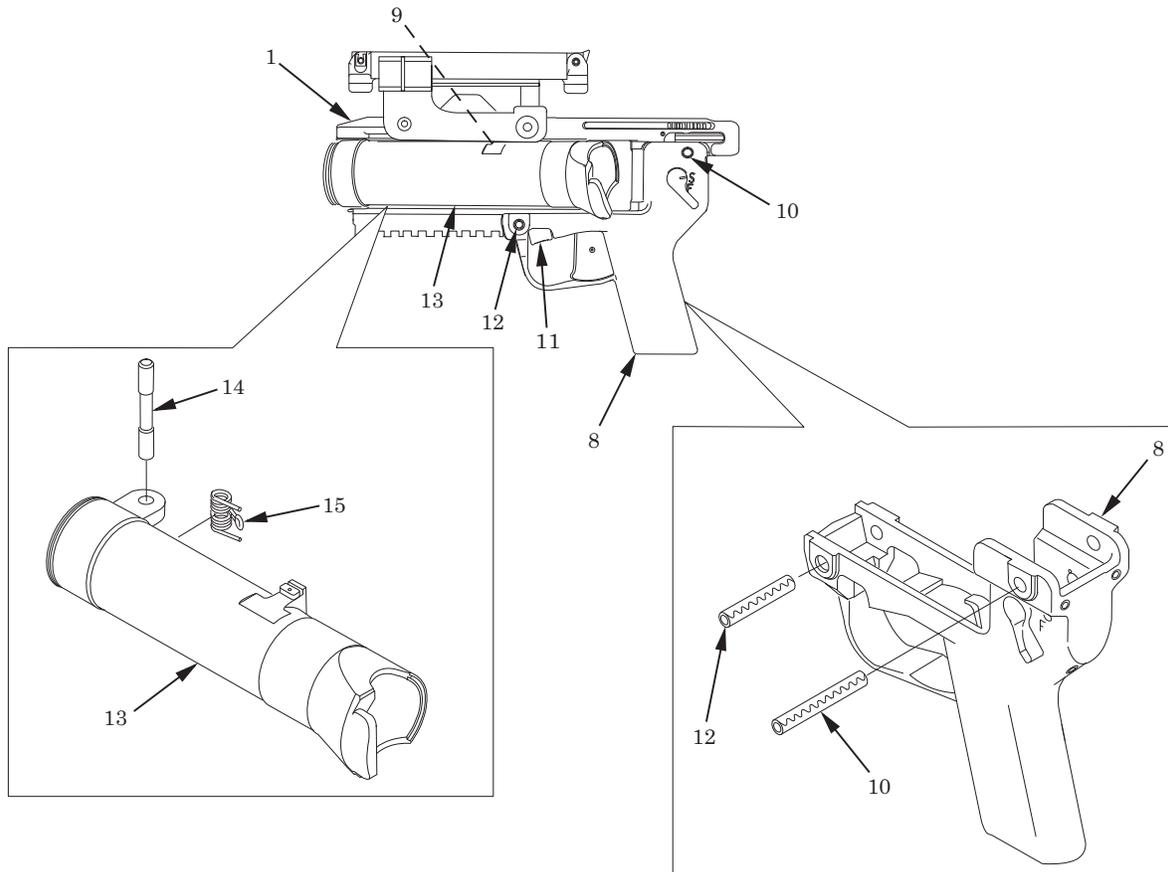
Removal of Barrel Assembly and Pistol Grip Assembly.
